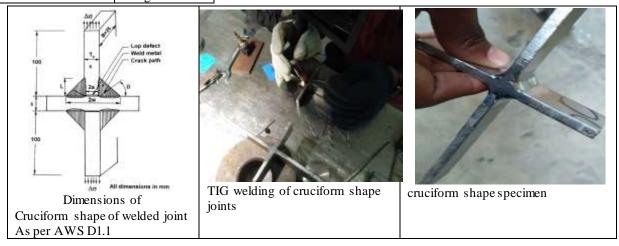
Fabrication of Cruciform shape weld joint
